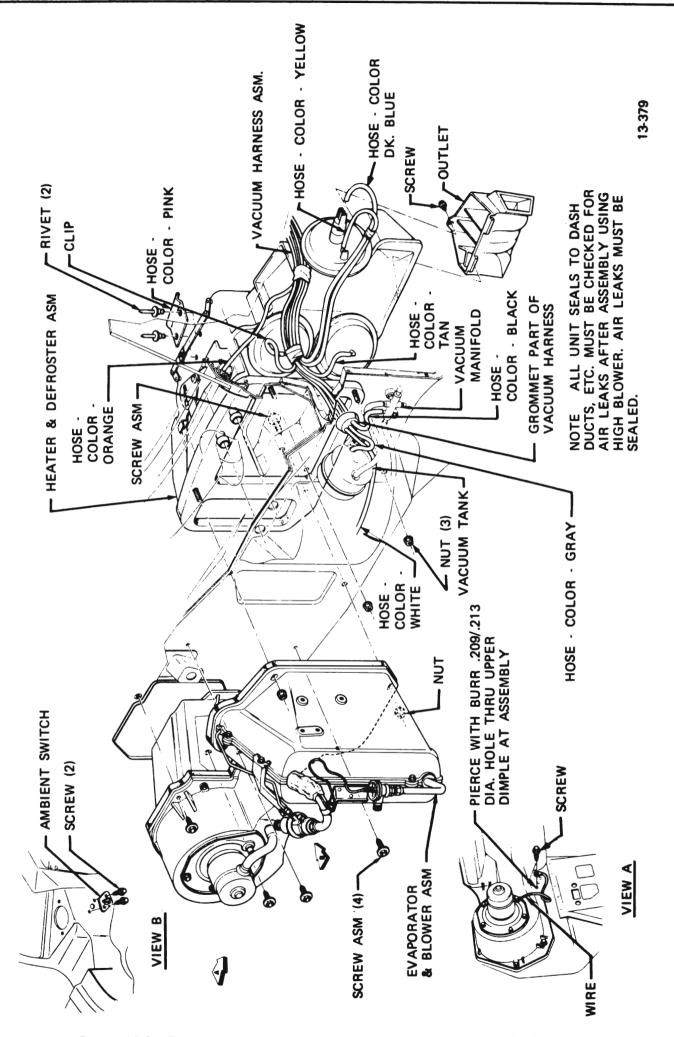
Evaporator and Heater Assembly to Dash - 4L-4N-4R-4P-4U-4V-4Y
